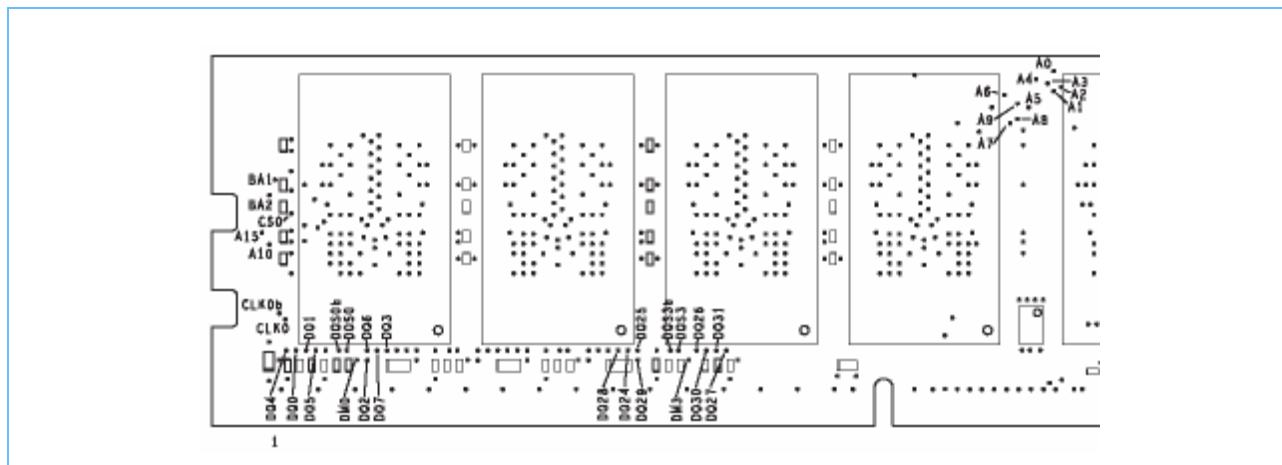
Test Point Identification (Raw Card Version B): Front View, Left Side
